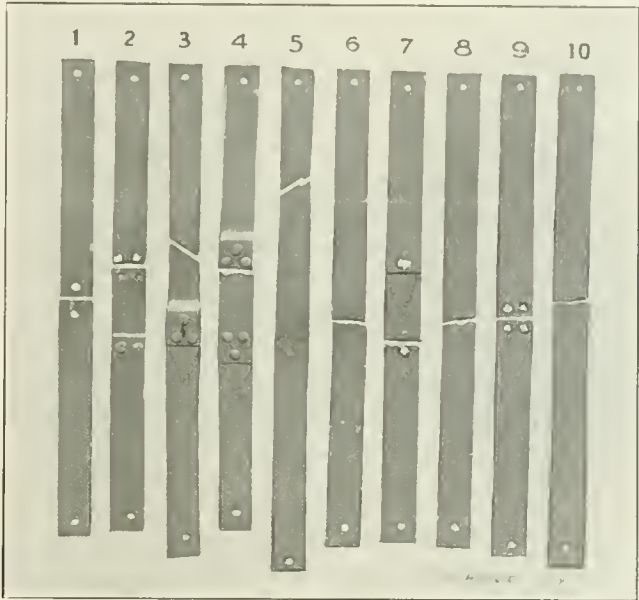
Test Pieces joined by Spot Welding, Riveting, etc.
